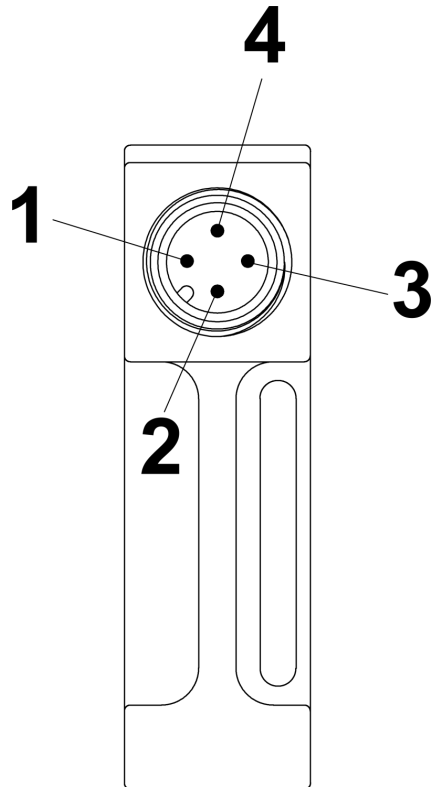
Pin assignment, connector M12x1 (Form 15x50)
